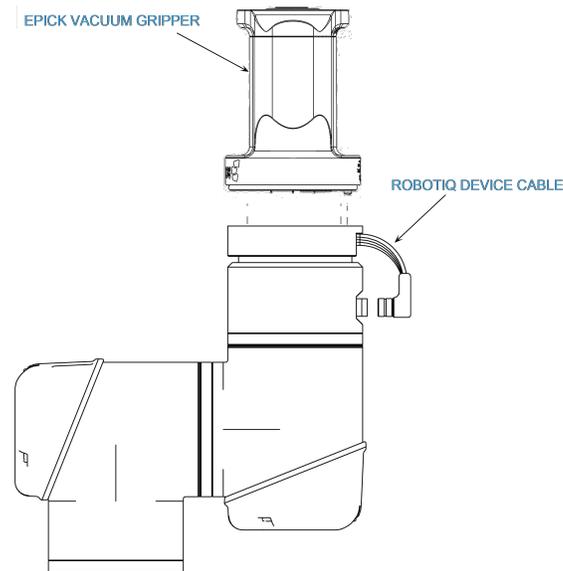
Robotiq EPick Gripper with device cable wiring scheme
